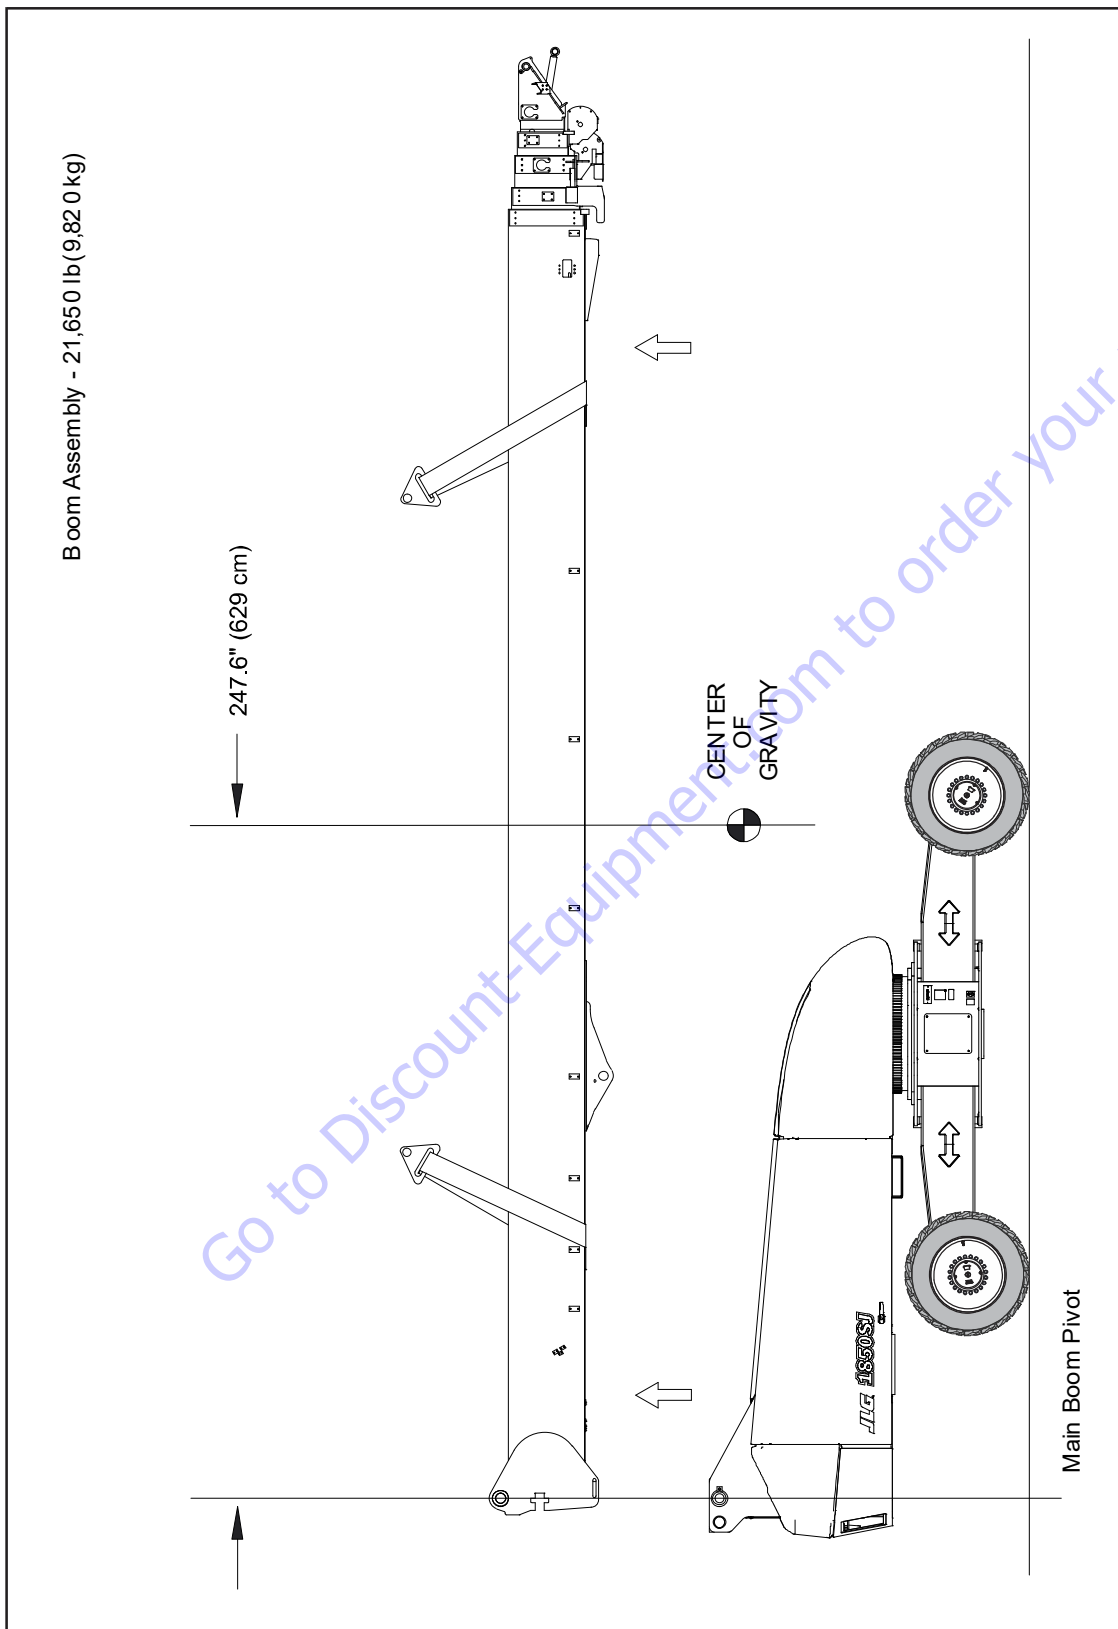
Swing Bearing Removal - Sheet 3 of 4
